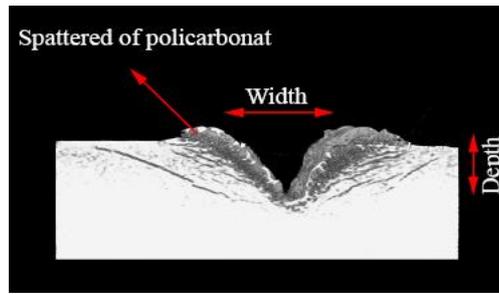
Schematic of geometric dimensions in the laser engraving process [28]
